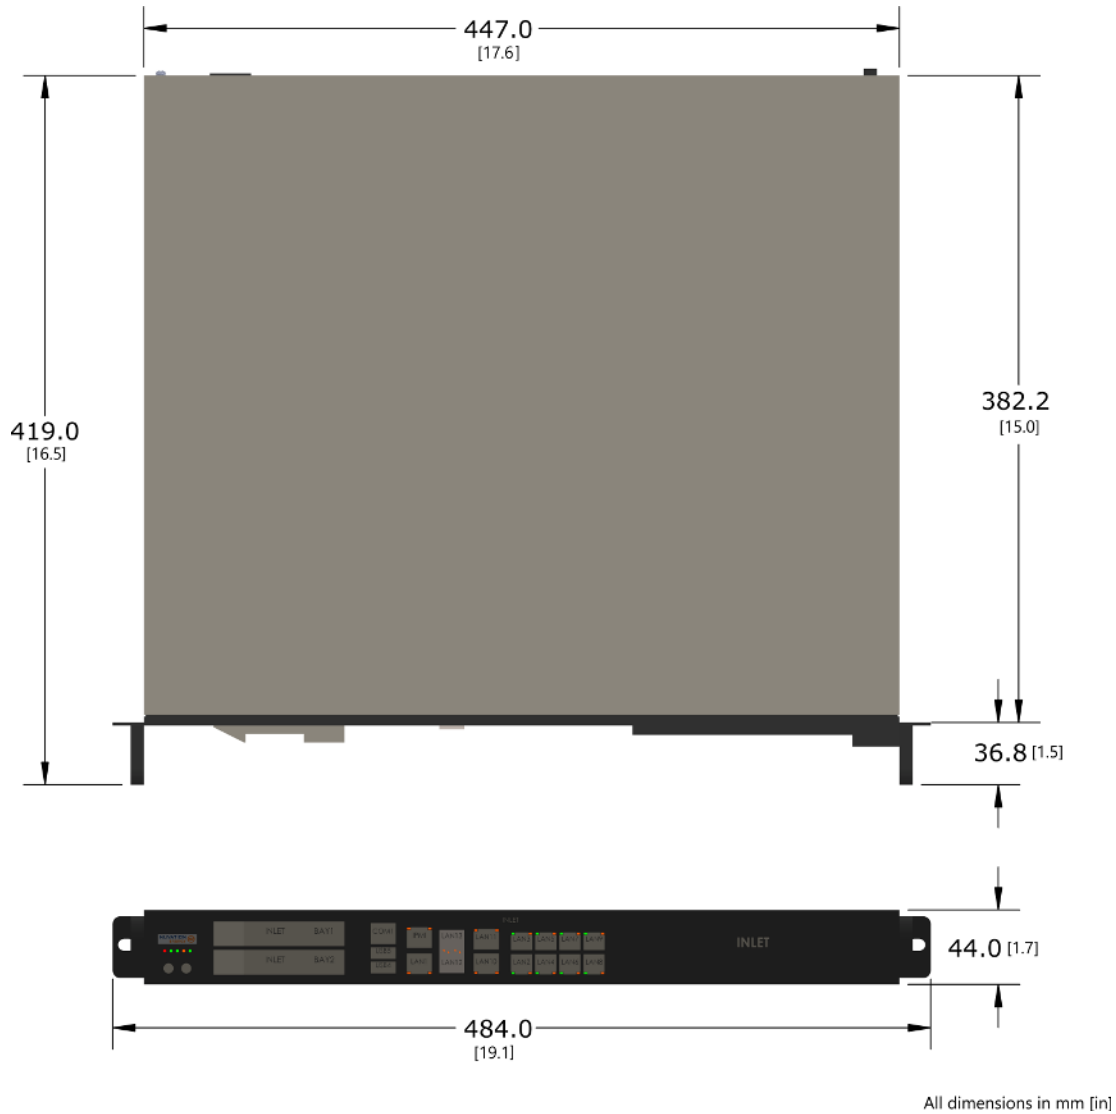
Mechanical Drawing of nController[®] Rack Mount
